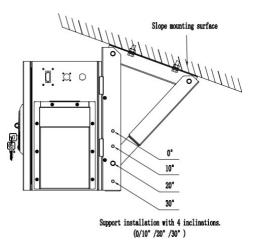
Diagram of Adjustment Angle of The Installation Plate
